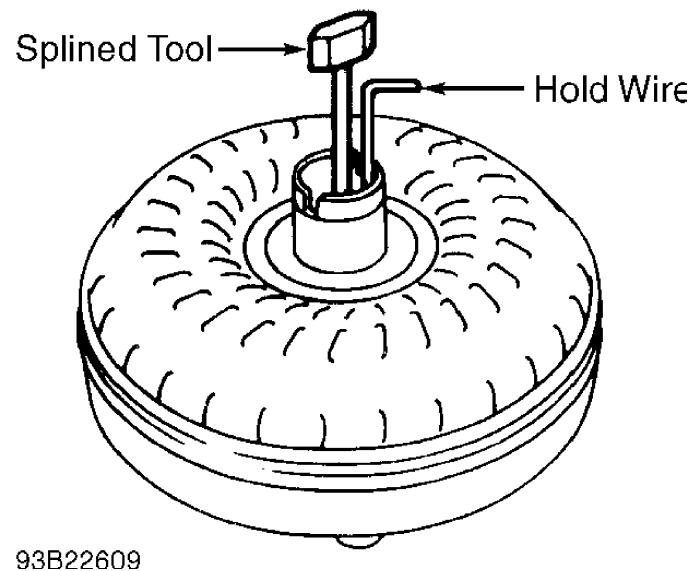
Checking Torque Converter One-Way Clutch Rotation Courtesy of Nissan Motor Co., U.S.A.
